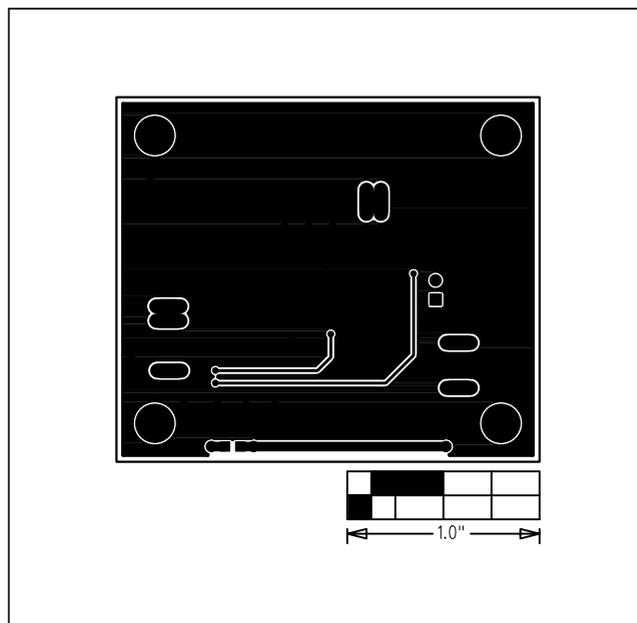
MAX15040 EV Kit PCB Layout—Solder Side
